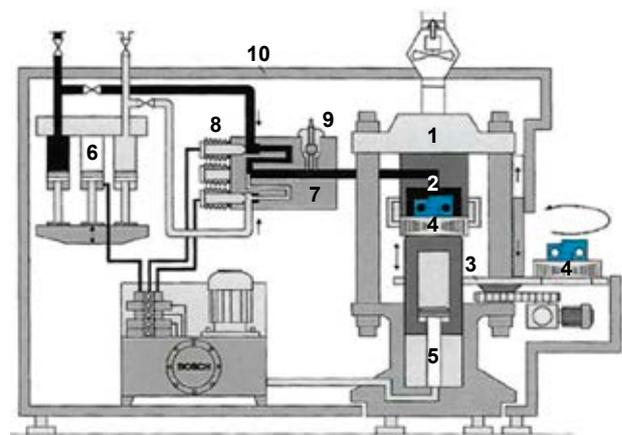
Design of the EXTRUDE HONE TEM P-350; 1 – Machine frame; 2 – Deburring Chamber; 3 – Index table; 4 – Closing plate; 5 – Closing hydraulic system; 6 – Gas metering system; 7 – Mixing block; 8 – Gas valves; 9 – Spark plug; 10 – Soundproof cabin; 11 – Index table rotating mechanism
